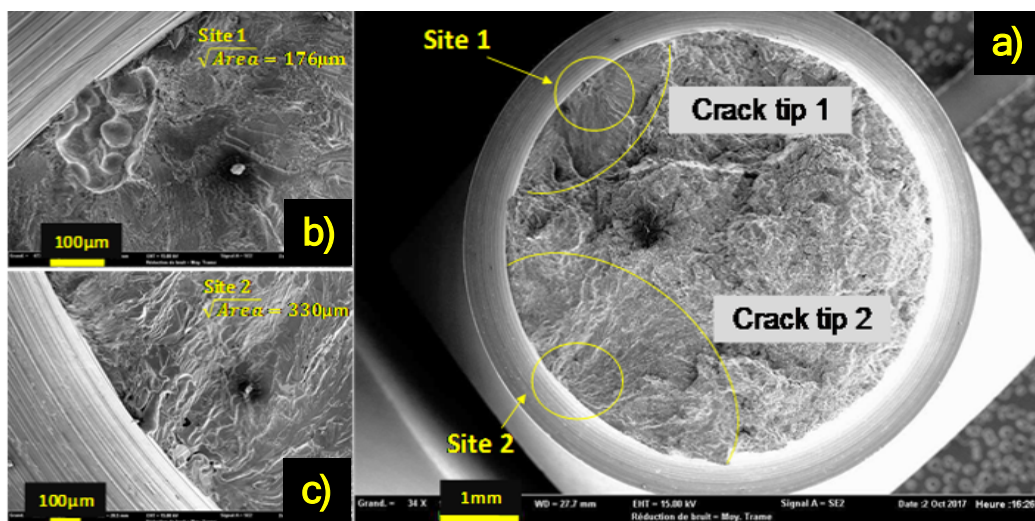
Specimen with multiple crack initiation sites, specimen B-NV-04, Sa=45MPa, Nf=129663 cycles, crack initiation from a pore at surface (a) Macroscopic view, detailed view of (b) gas pore and (c) micro-shrinkage pore
